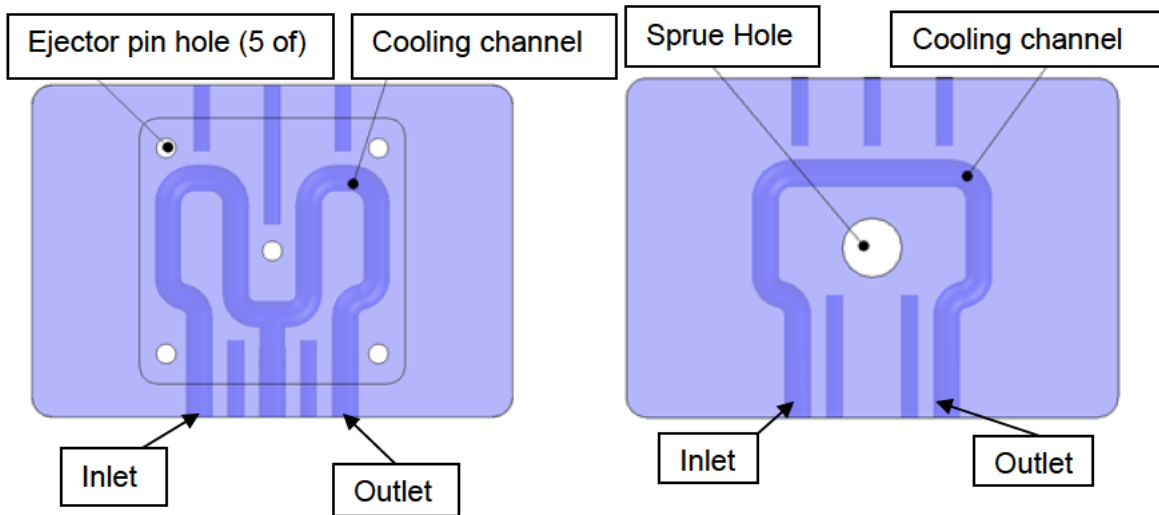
Cooling channel layout on the moving half      Figure 7.4: Cooling channel layout on the fixed half
